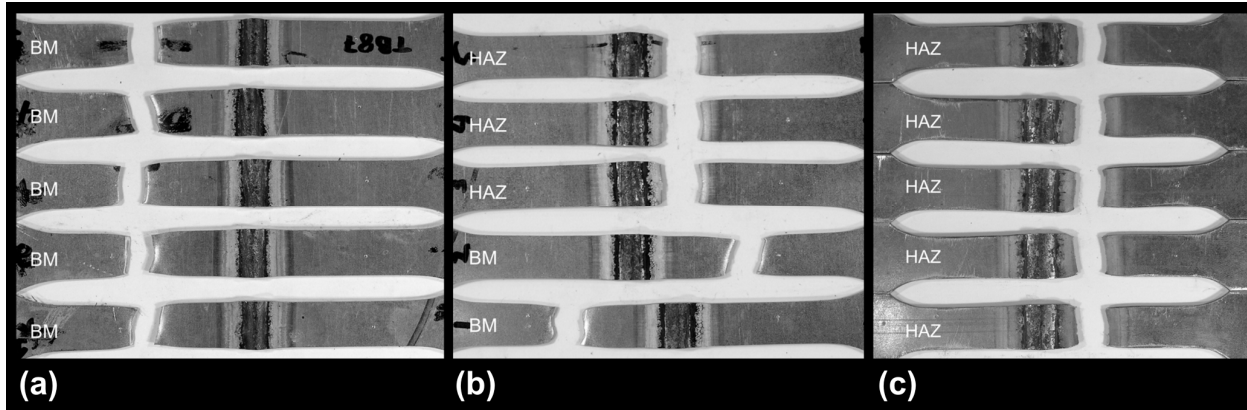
Transverse weld tensile test specimens: a) TB87 low heat input weld with 100% BM failure, b) TB94 medium heat input weld with mixed failure locations, and c) TB88 high heat input weld with 100% HAZ failure.
